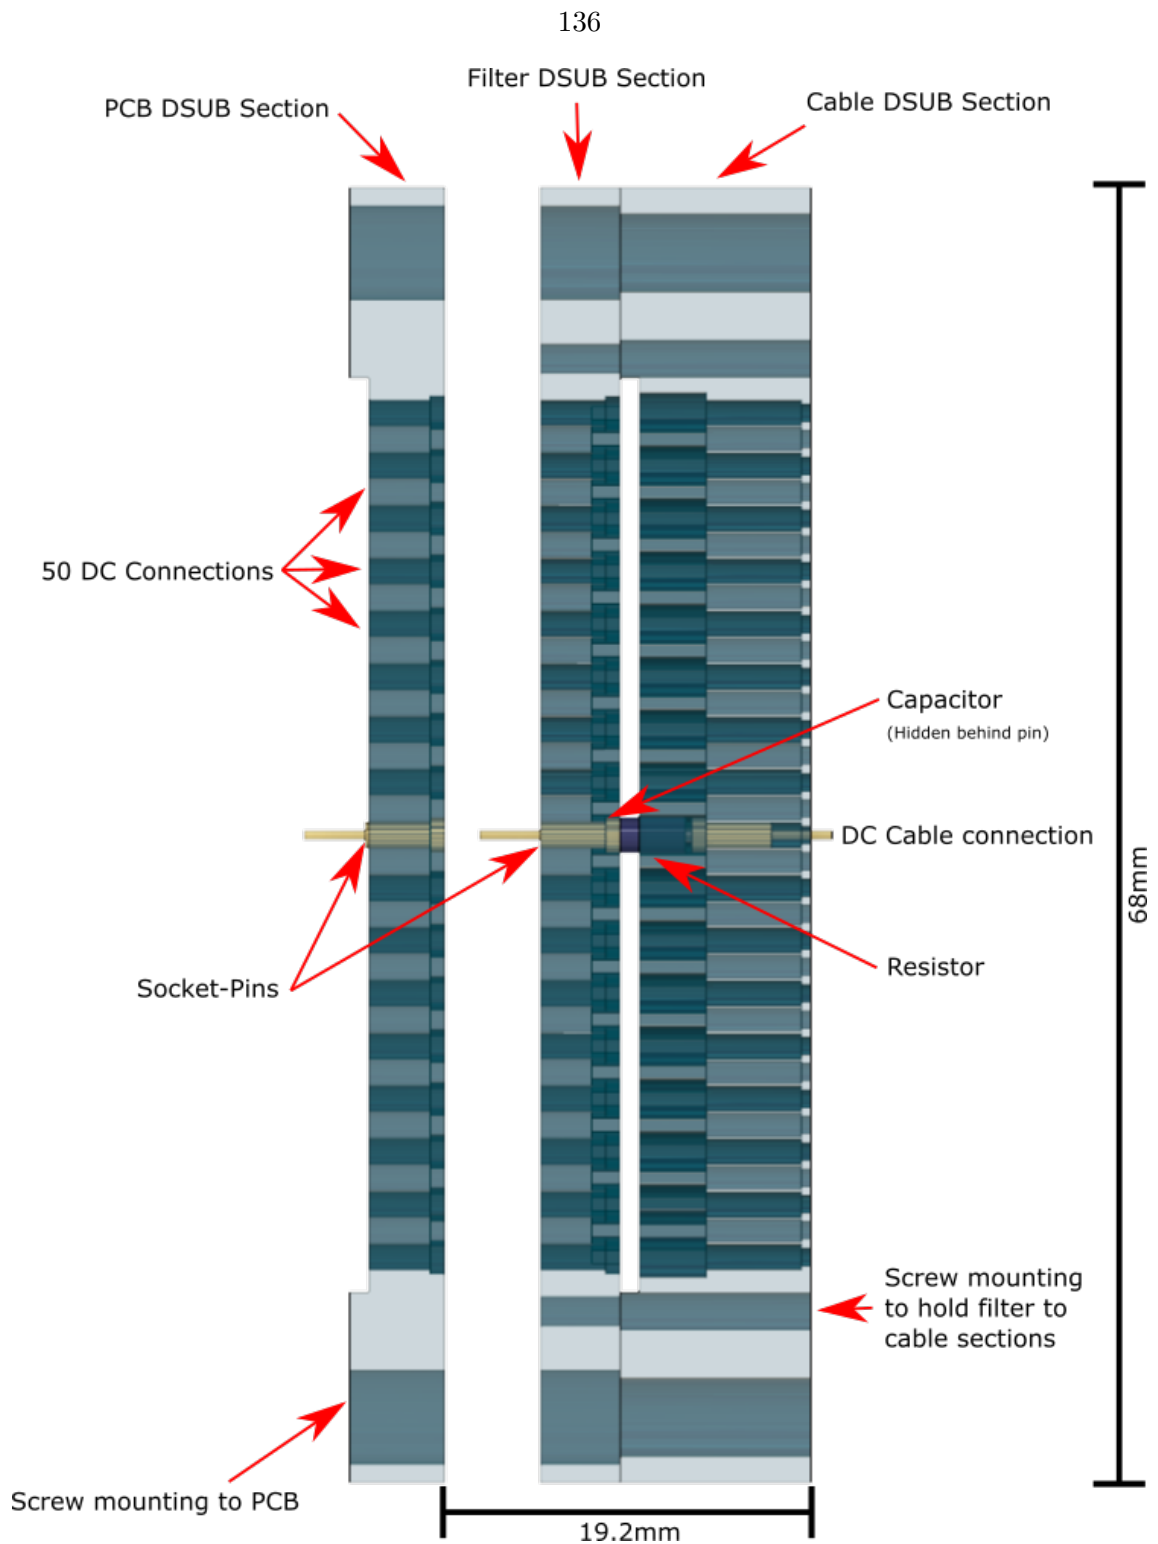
Custom DSUB with built in filtering. The PCB section is soldered to the main PCB, that is wirebonded to the trap. The filter and cable sections normally remain within the vacuum system. The DSUB contains 50 connections and measures 69 mm long, 19.2 mm deep, when closed, and 9 mm wide.
